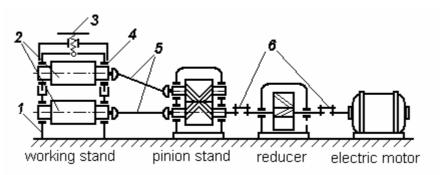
Single-stand rolling mill: 1 – mill housing; 2 – rollers; 3 – screwdown structure; 4 – bearings; 5 – spindles; 6 – clutches
